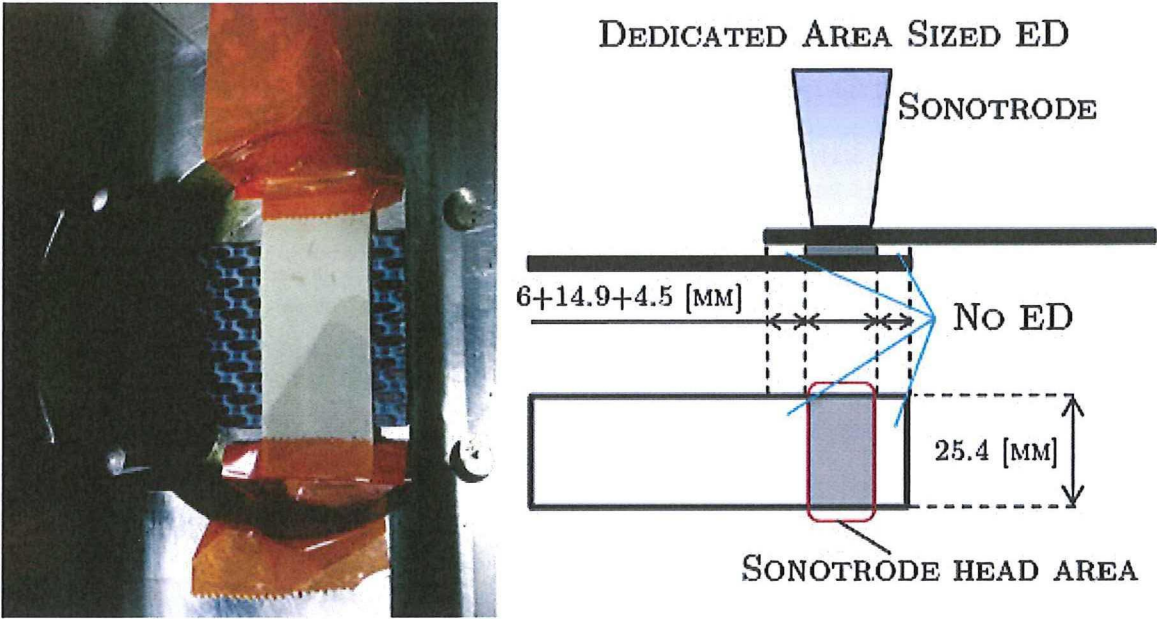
| Dedicated ED size welding showing ED attachment to the jig on the left and a schematic view on the right
